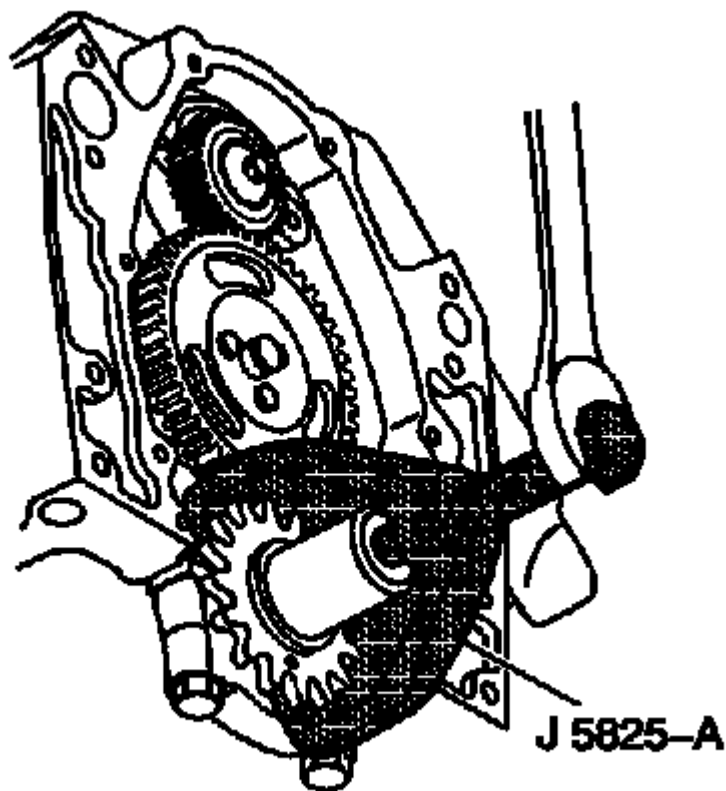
Removing Crankshaft Sprocket Using J 5825-A
